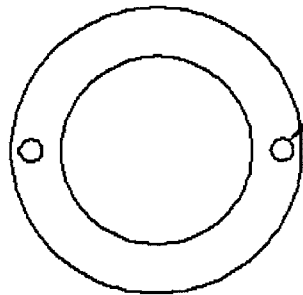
Clamp for securing the electrode mounting shafts onto the flexure
